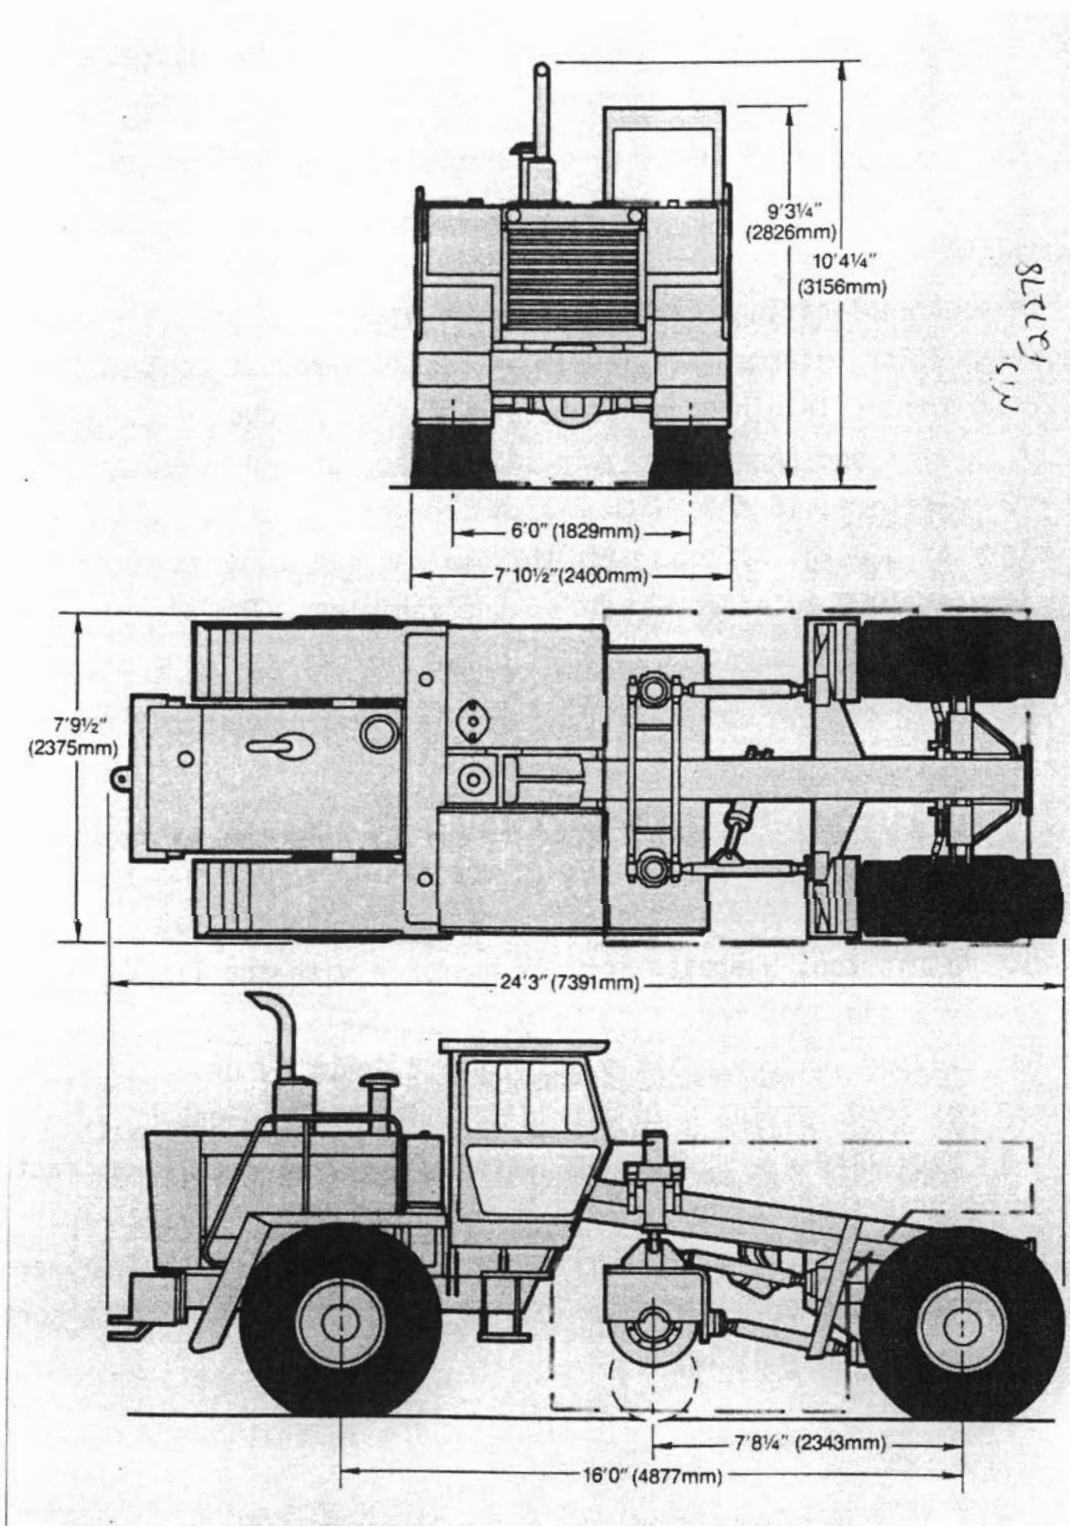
Schematic View of Dresser/Galion RP 60 Road Planer
